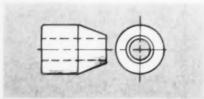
The clamp shown in this particular sketch has a turned conical surface.
